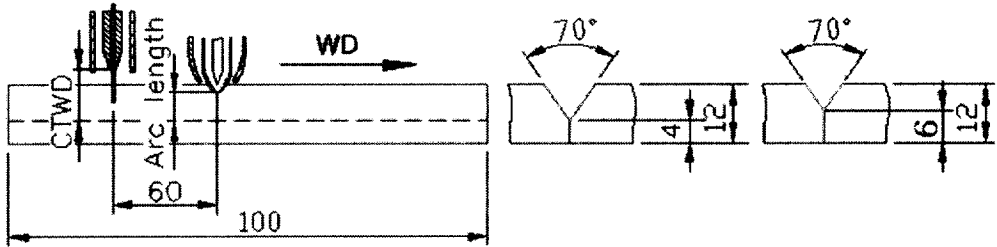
Schematic drawing of plasma-MAG tandem welding
